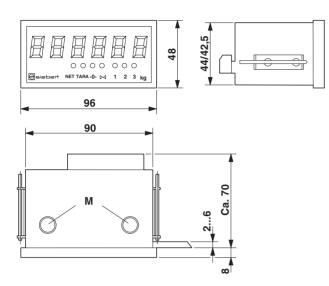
Dimensions of display S102 ... (dimensions in mm)
